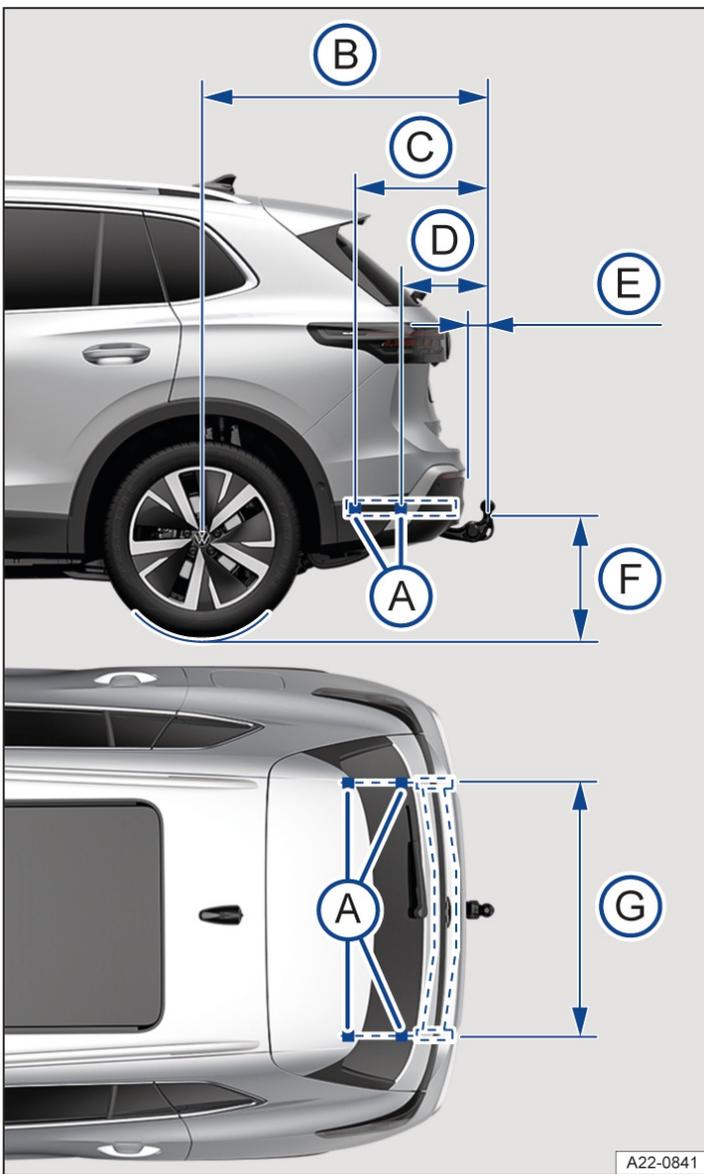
Dimensions and mounting points for retrofitting a towing bracket.
